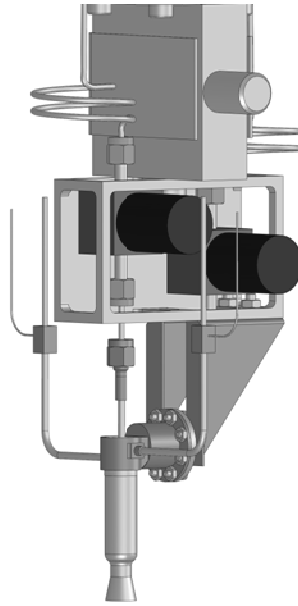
CAD drawing of the DM thruster mounted on thrust stand
